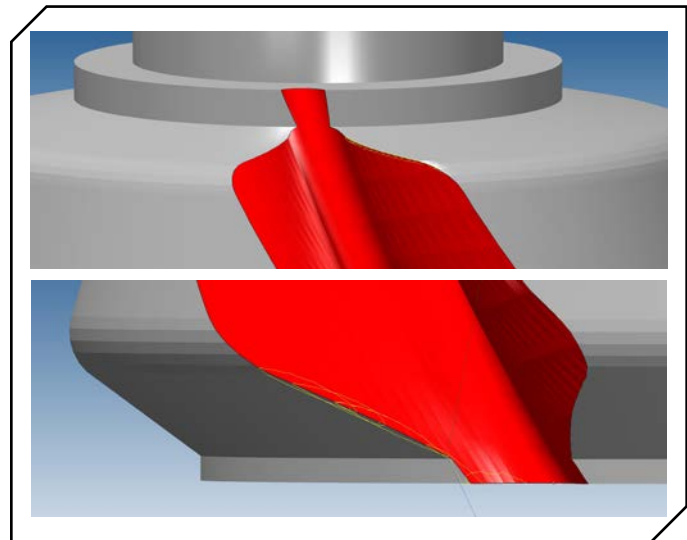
Edges to be deburred, resulting from the cutting area between the component envelope and the component gap.
